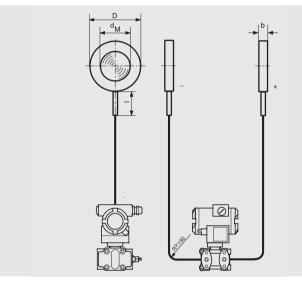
/39 Dimensions of sandwich-type diaphragm seal (without flange) with flexible capillary tube
